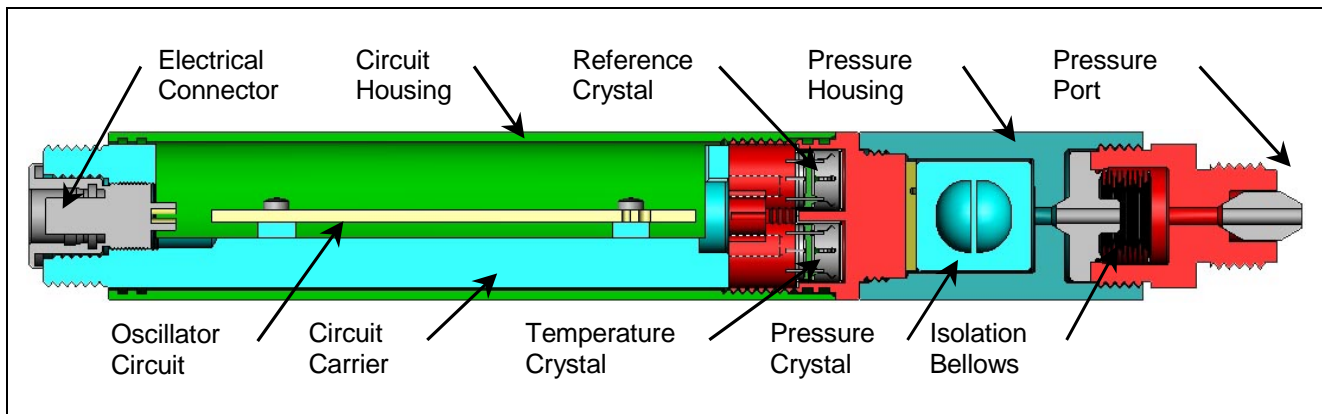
Parts of a QUARTZDYNE® Pressure Transducer (Model QUB shown).
